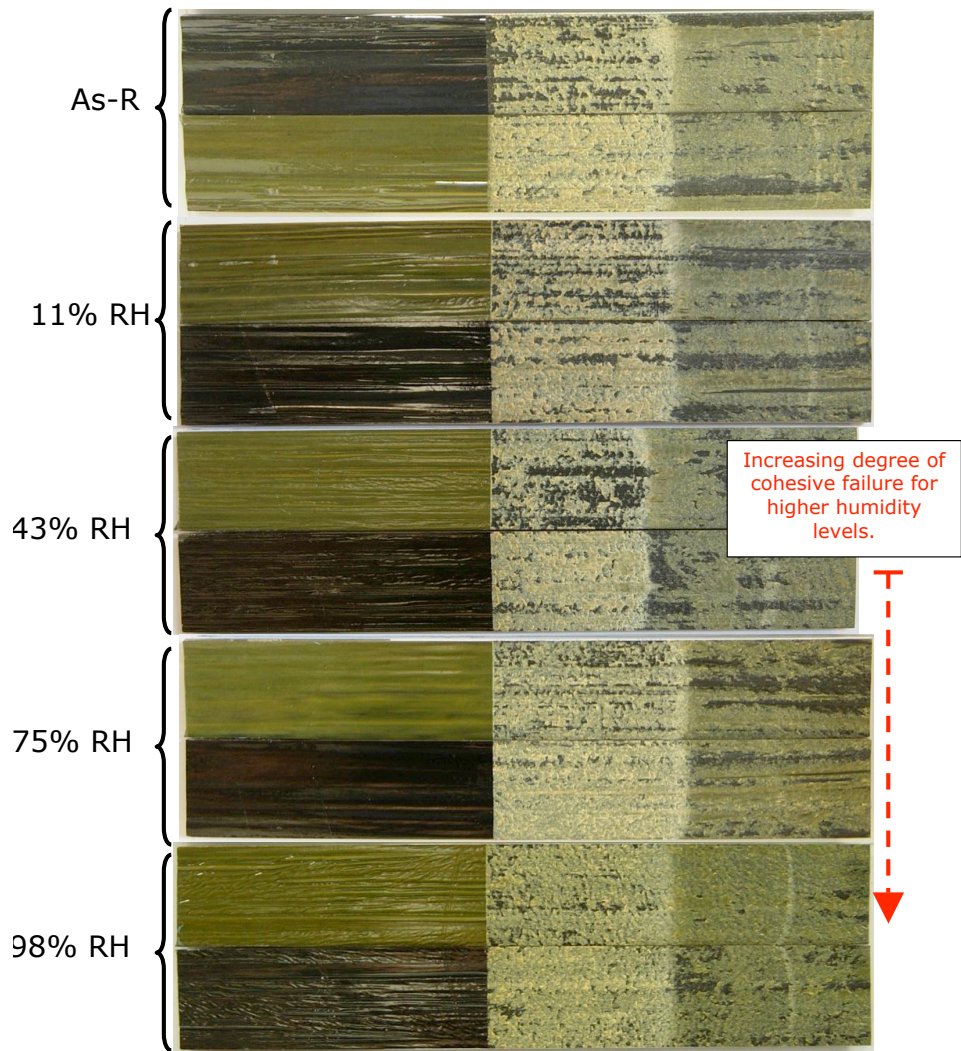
Fracture surfaces of Mode II ELS test.
